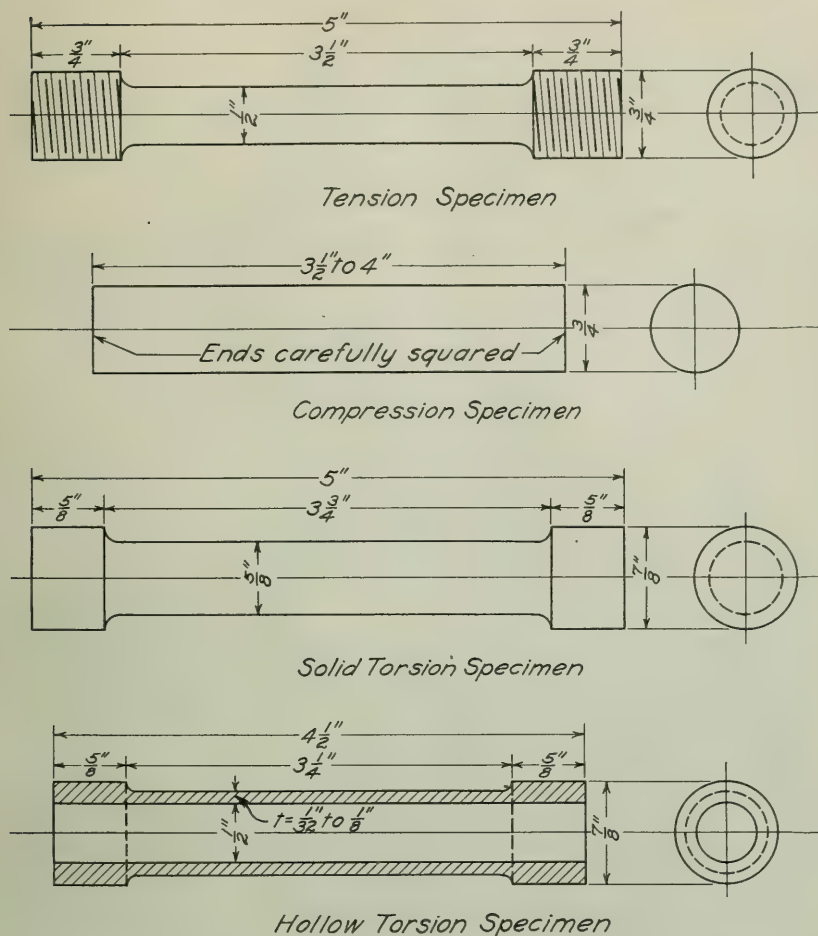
FORM AND DIMENSIONS OF SMALL TEST SPECIMENS
